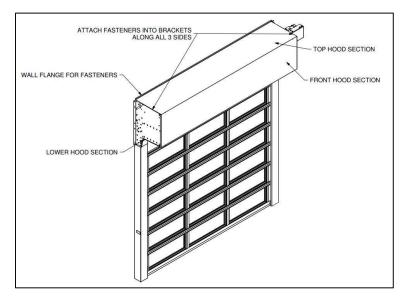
HOOD INSTALL (3 SECTION OPTION SHOWN)
